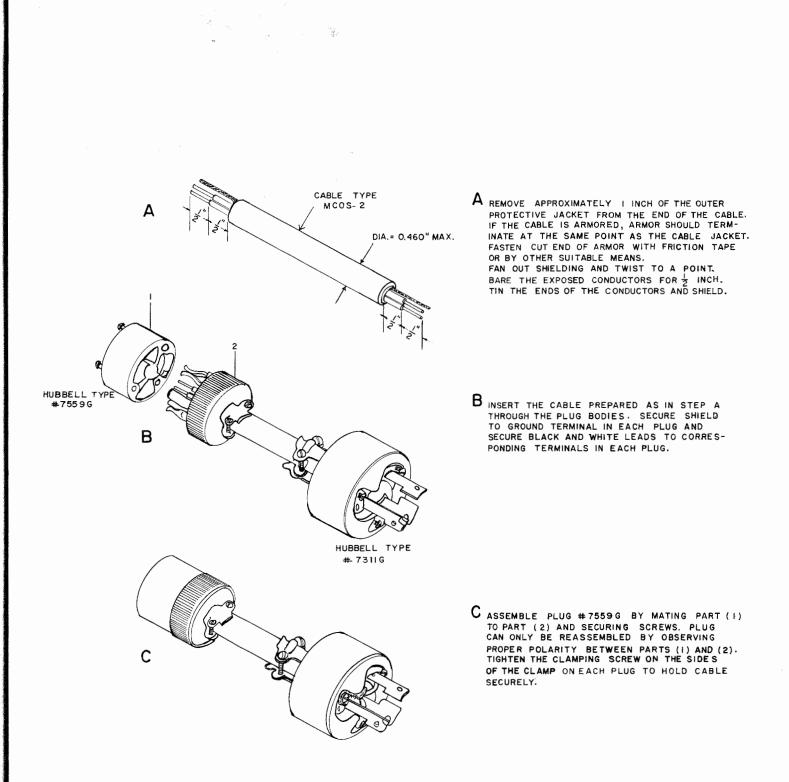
Assembly of A.C. Connectors to Type MCOS-2 Cable
